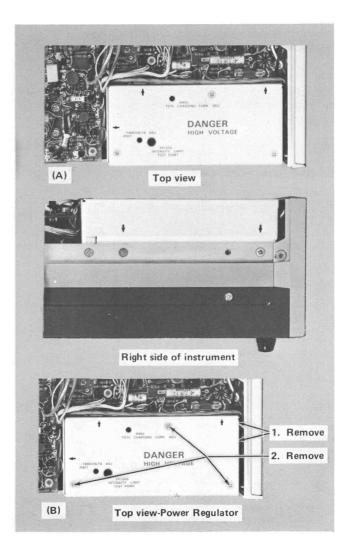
Removing (A) Power Regulator and (B) Regulator cover.
